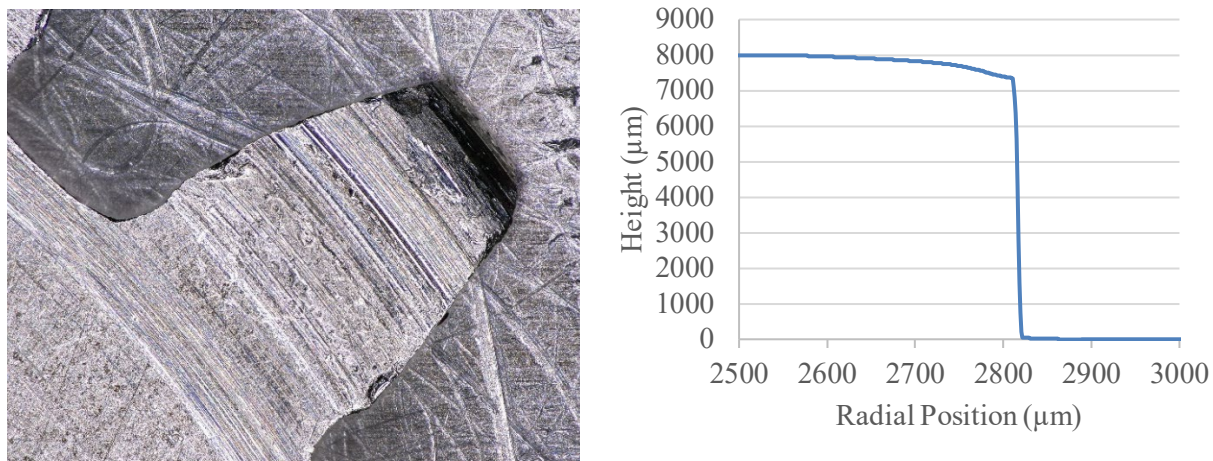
Microscope image of gear tooth wear (*left*) and radial profile of tooth height at the tip (*right*)
